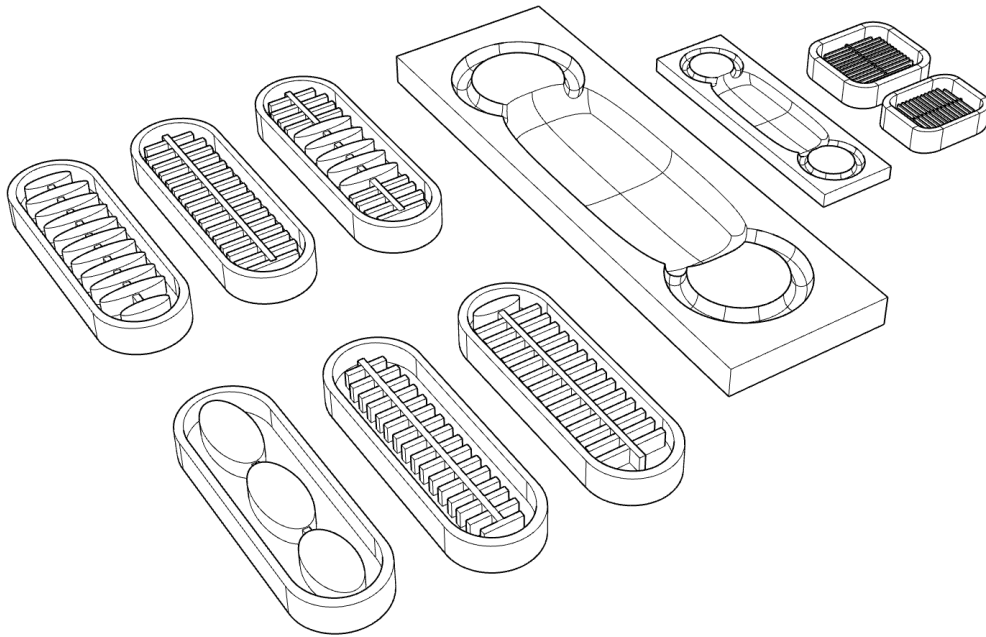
Soft rubber additive manufacturing for soft robot construction moulds.
